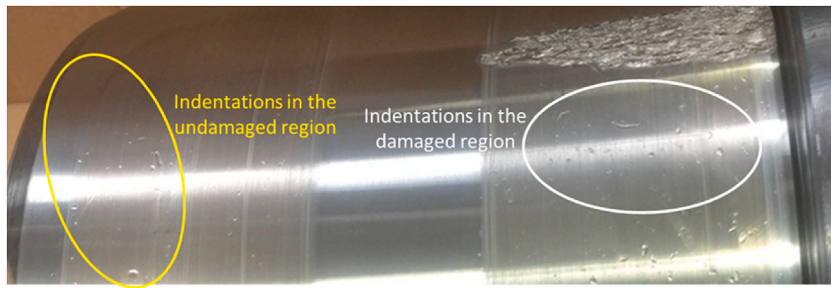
Surface indents in and out the severely damaged rollers' strikes.
